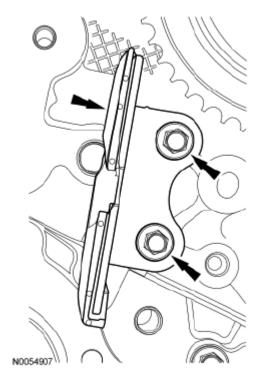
Locating LH Secondary Timing Chain Tensioner Bolts Courtesy of FORD MOTOR CO.
